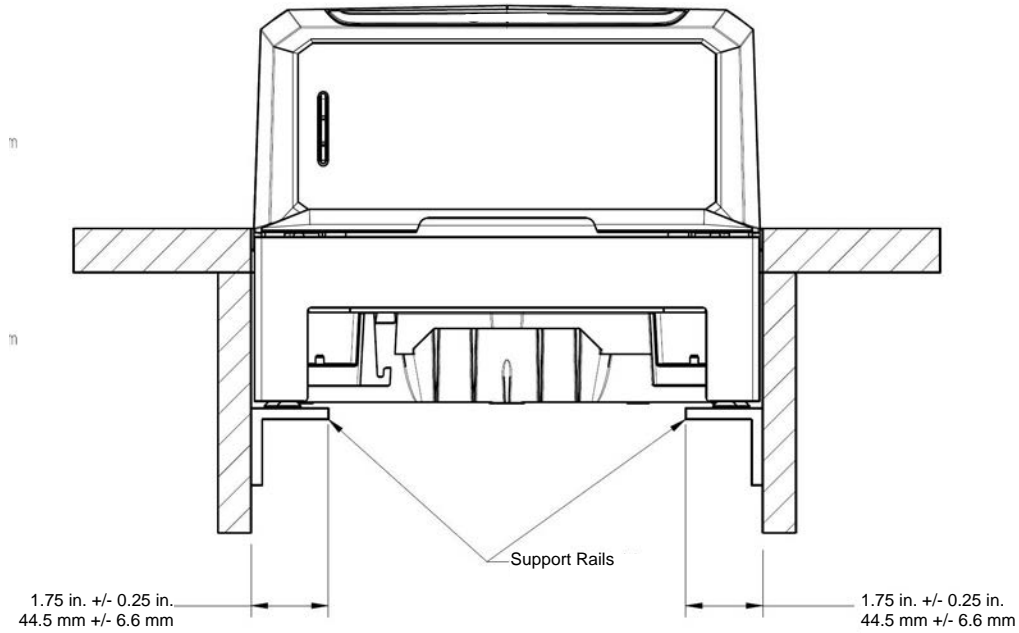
MP6000 - Medium Unit Front View Dimensions
